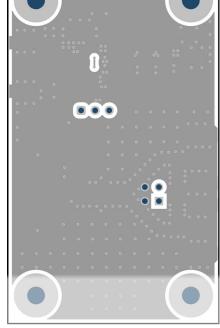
PCB Layout Example from LMK6 EVM, Figure 12-5. PCB Layout Example from LMK6 EVM, GND Layer Bottom Layer
